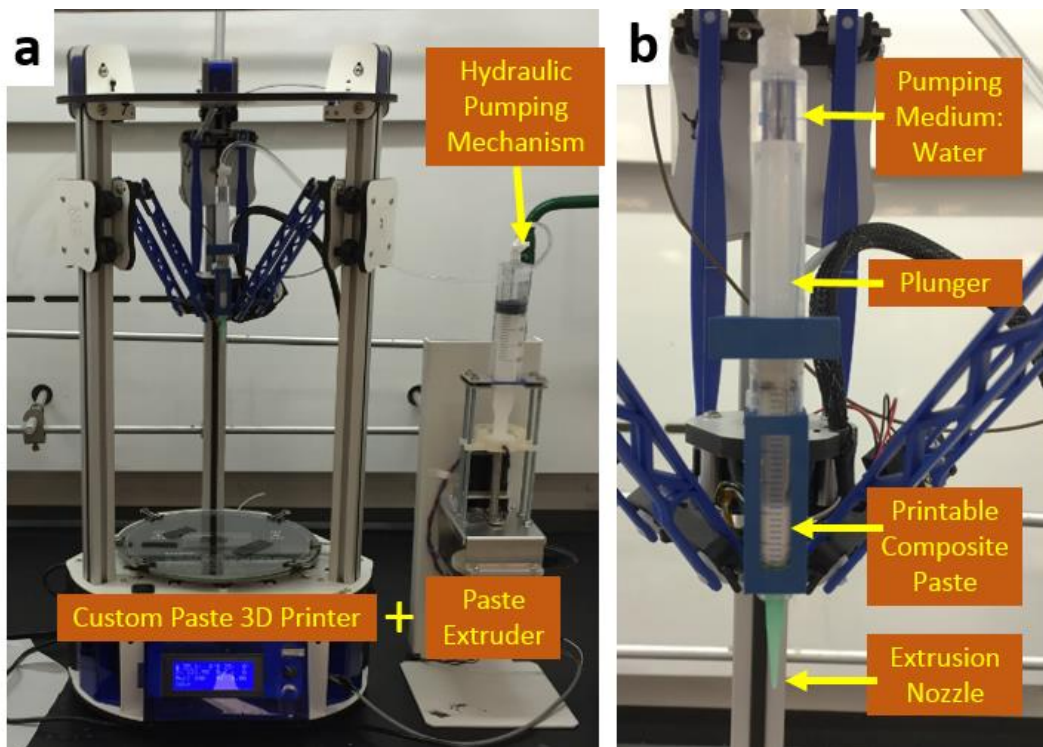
(a) Complete paste 3D printing apparatus and (b) close-up view of extrusion syringe mounted at the print head.
